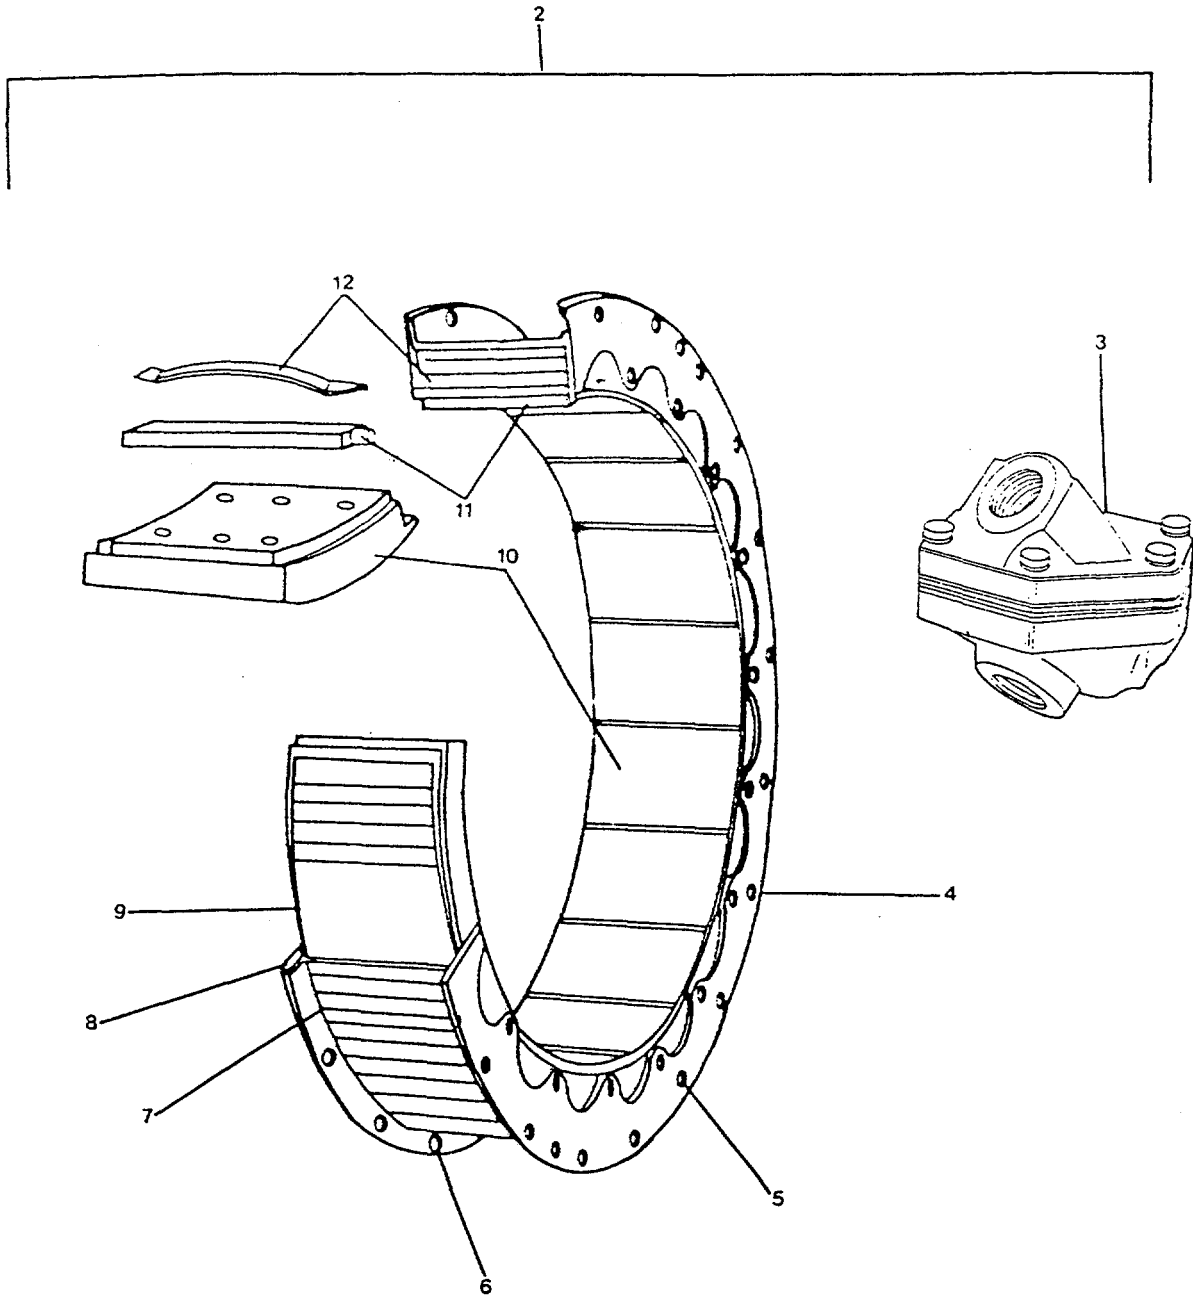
MAIN PROPELLER SHAFT AND BRAKE
